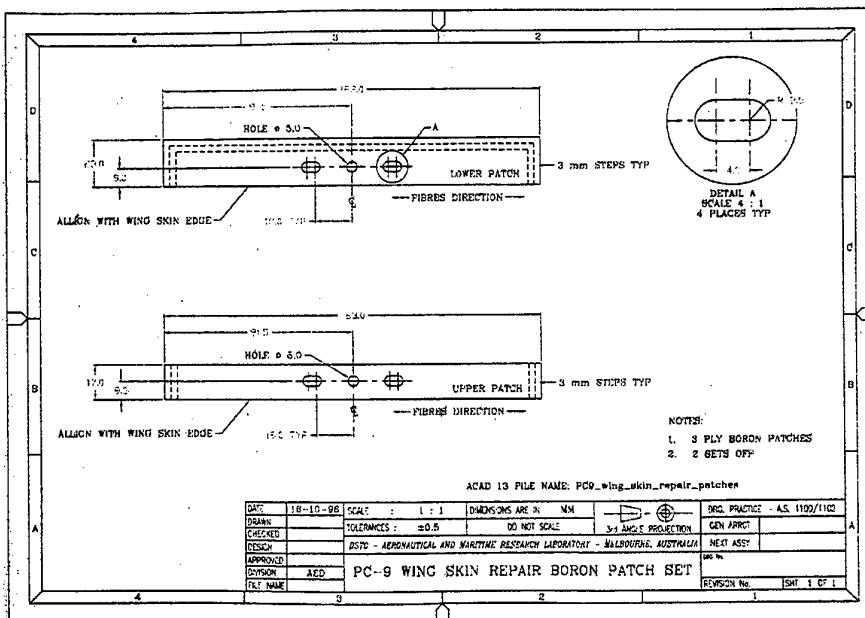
Starboard Wing Uplock Mechanism- Patches.
